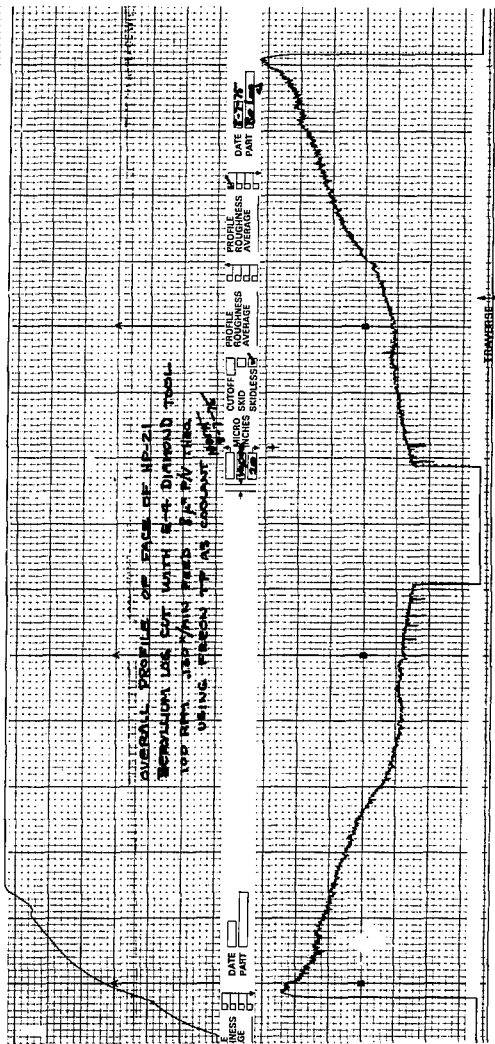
Trace of face cut with Moore tool #E-4; Freon TF coolant.
